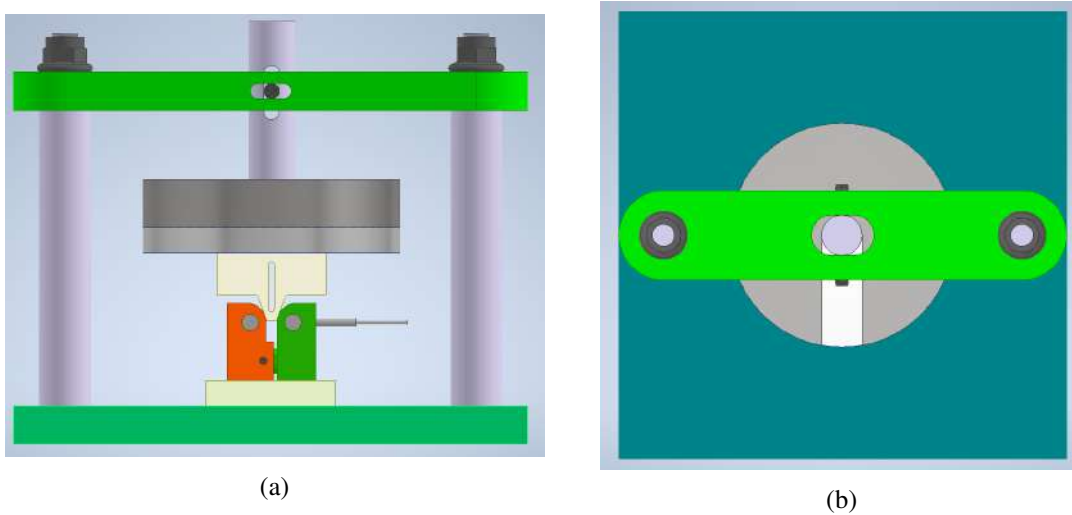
Second design with shafts and a horizontal beam support: (a) front view and (b) top view.
